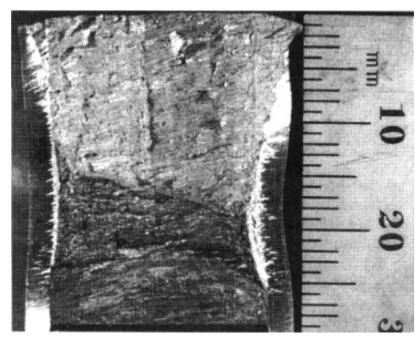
Fracture surface of unaged weld metal PWCE tested at 25°C
